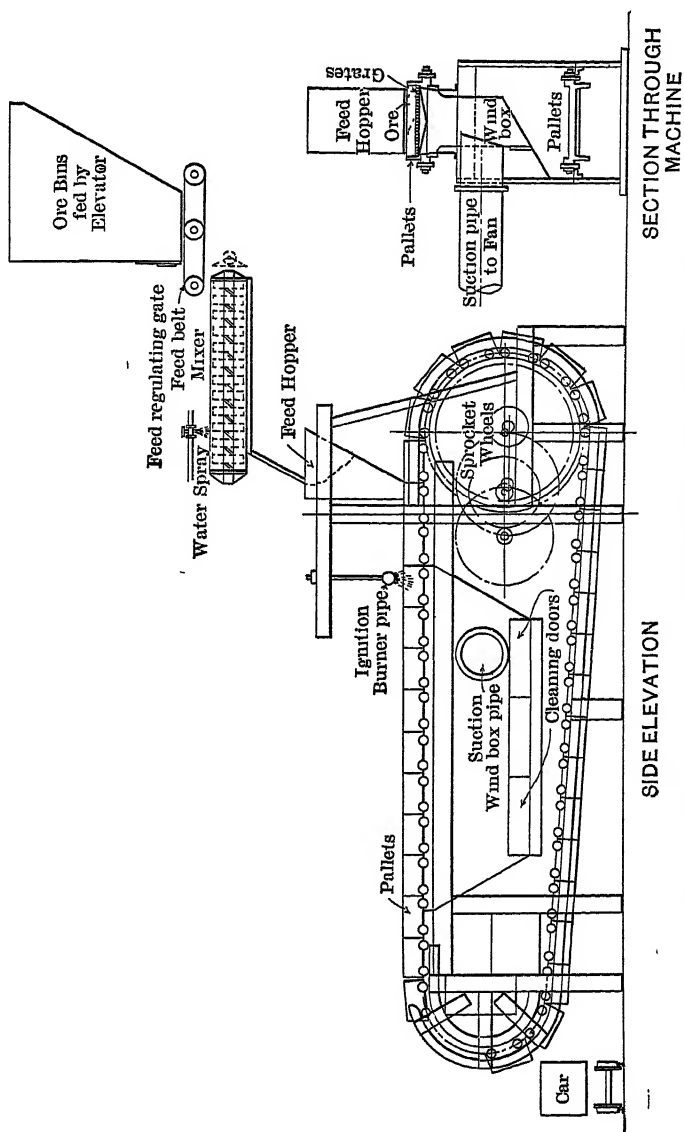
Dwight and Lloyd Sintering-Machine, Conveyor Type.
